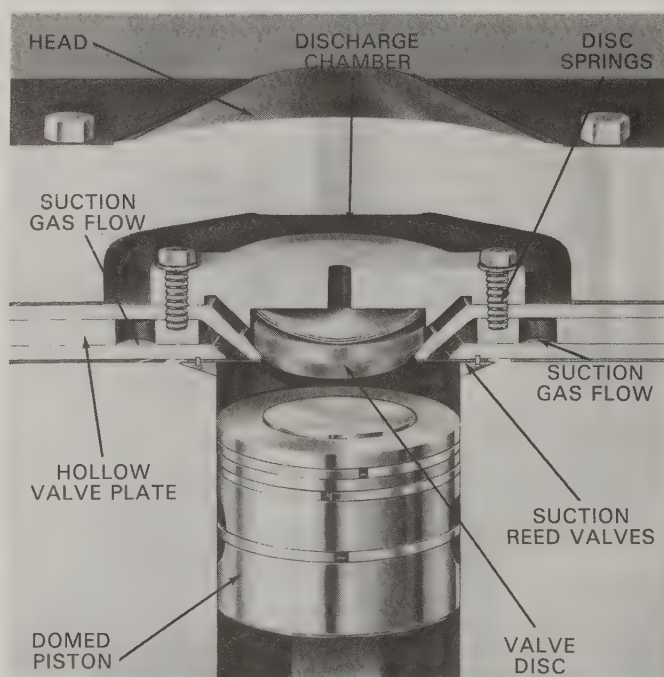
The disc-type valve design is shown in this artist's view. The hollow valve plate provides passage for suction gas and has conventional reed valves for gas flow into the cylinder. The large discharge valve disc is held in place by disc springs. The design improves volumetric efficiency by up to 25 percent. (Copeland Corp.)
